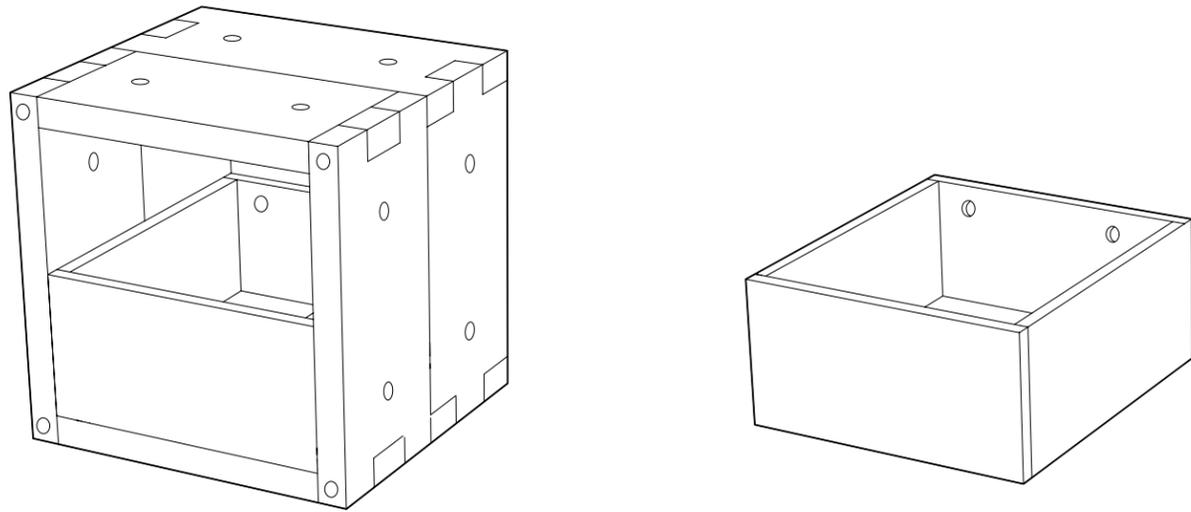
Modular Planter Box Structure (right) Tray (Left). Image By Author
